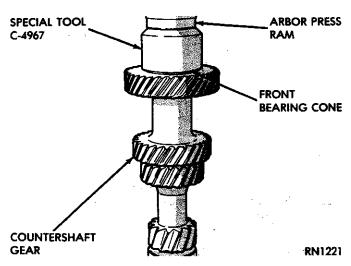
Installing Countershaft Gear Front Bearing Cone
